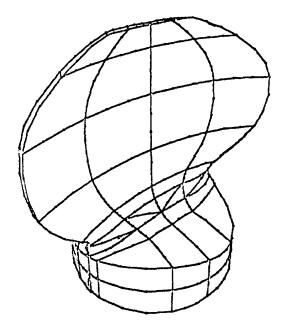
Blade-Fillet-Palm (Bolts as Rods) Model (shown without bolts)
